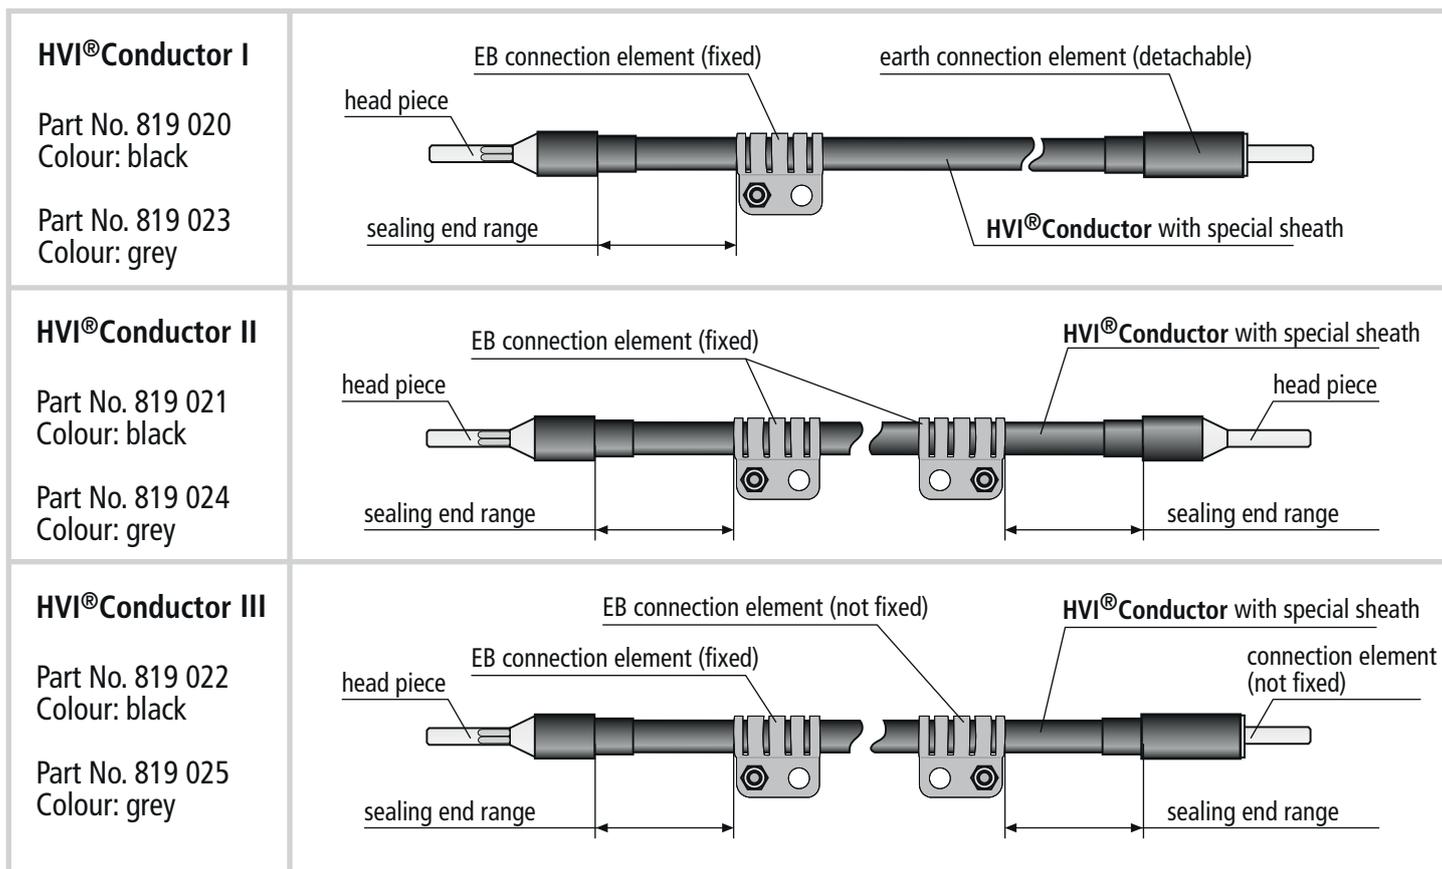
Design of the HVI® Conductor as assembled conductor with factory-mounted head piece
